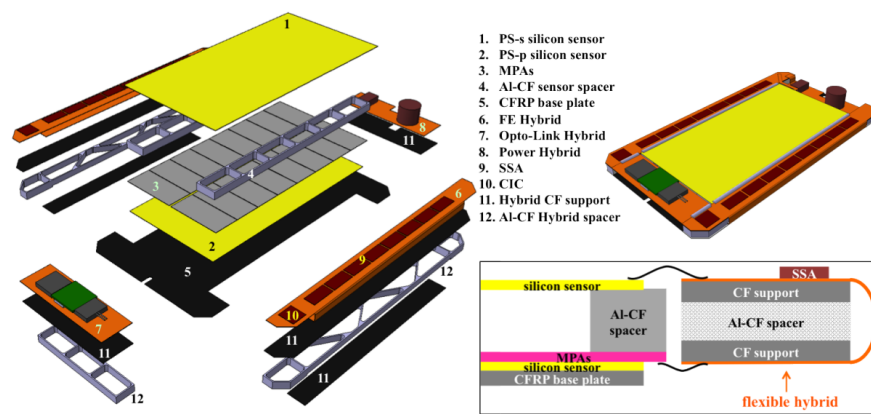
Exploded view of Pixel Sensor Module.
